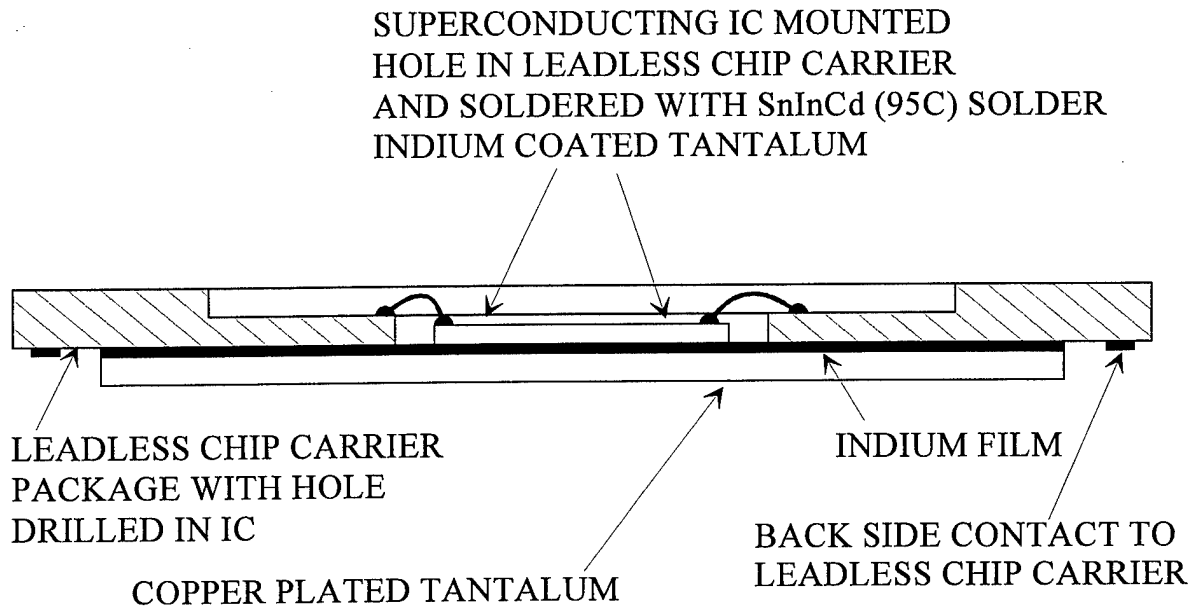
Assembly of tantalum base, with IC soldered to it, glued to the back of a ceramic package pre-drilled with a hole in the IC well.
